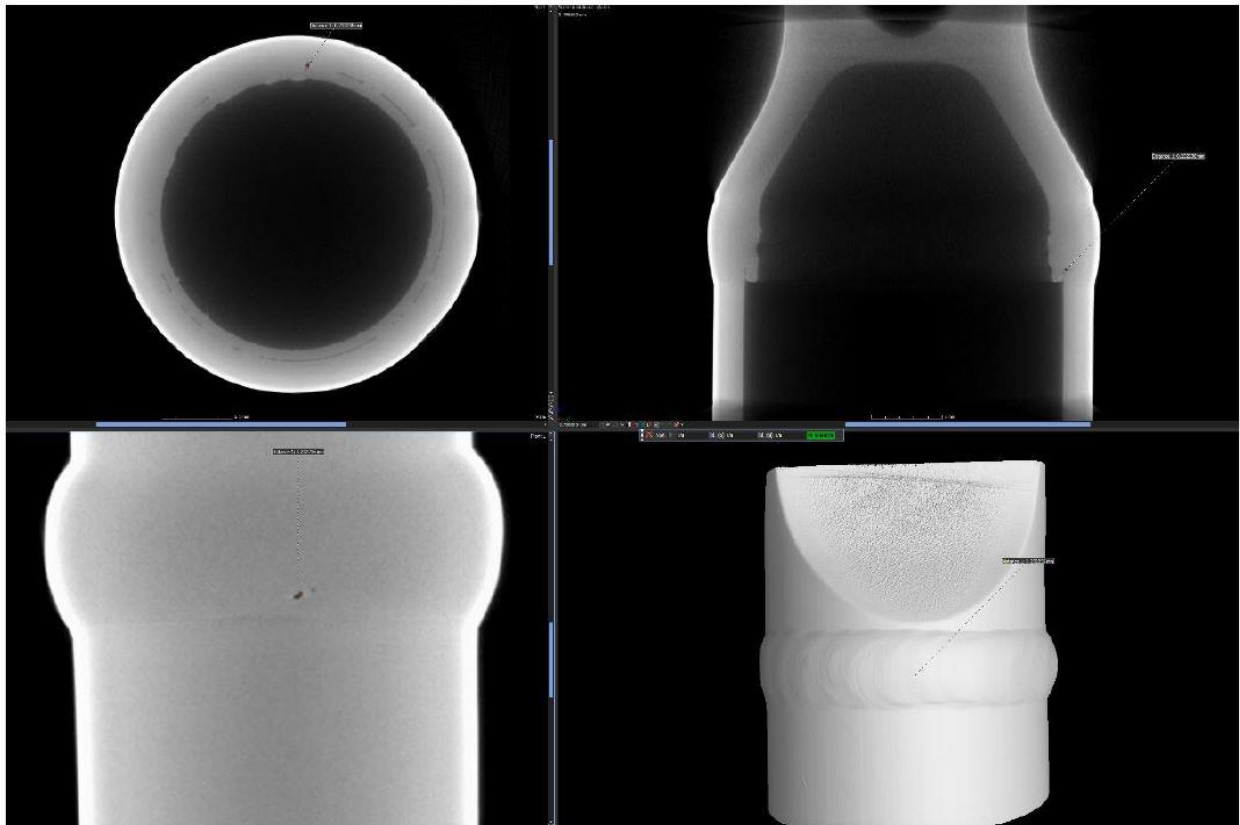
Tomography: Sample 2, Welding 2.
